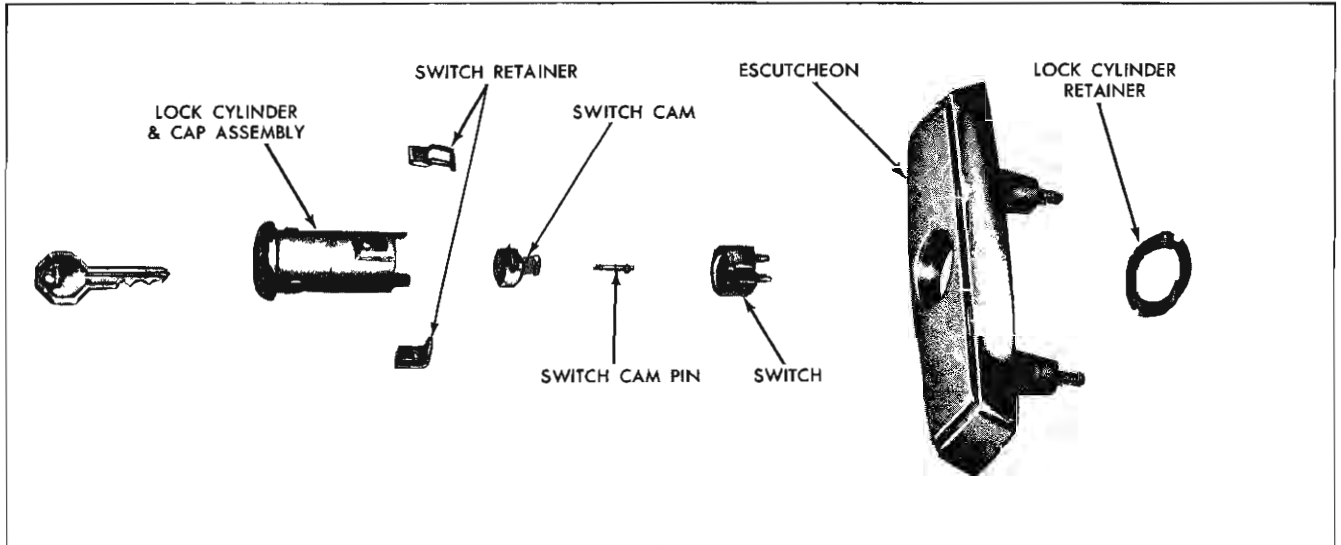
Lock Cylinder, Switch and Escutcheon
